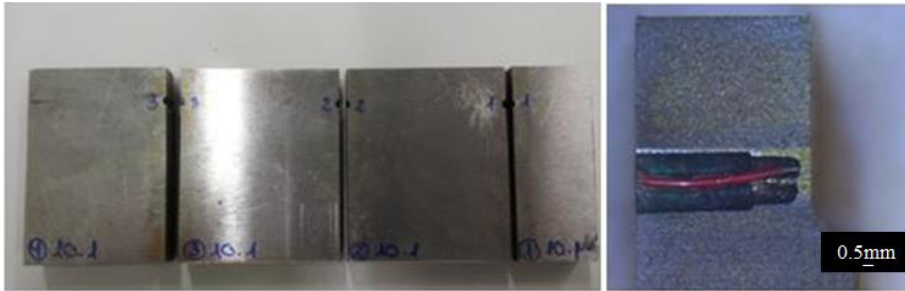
Workpiece cut by wire EDM and thermocouple location inside the hole.
